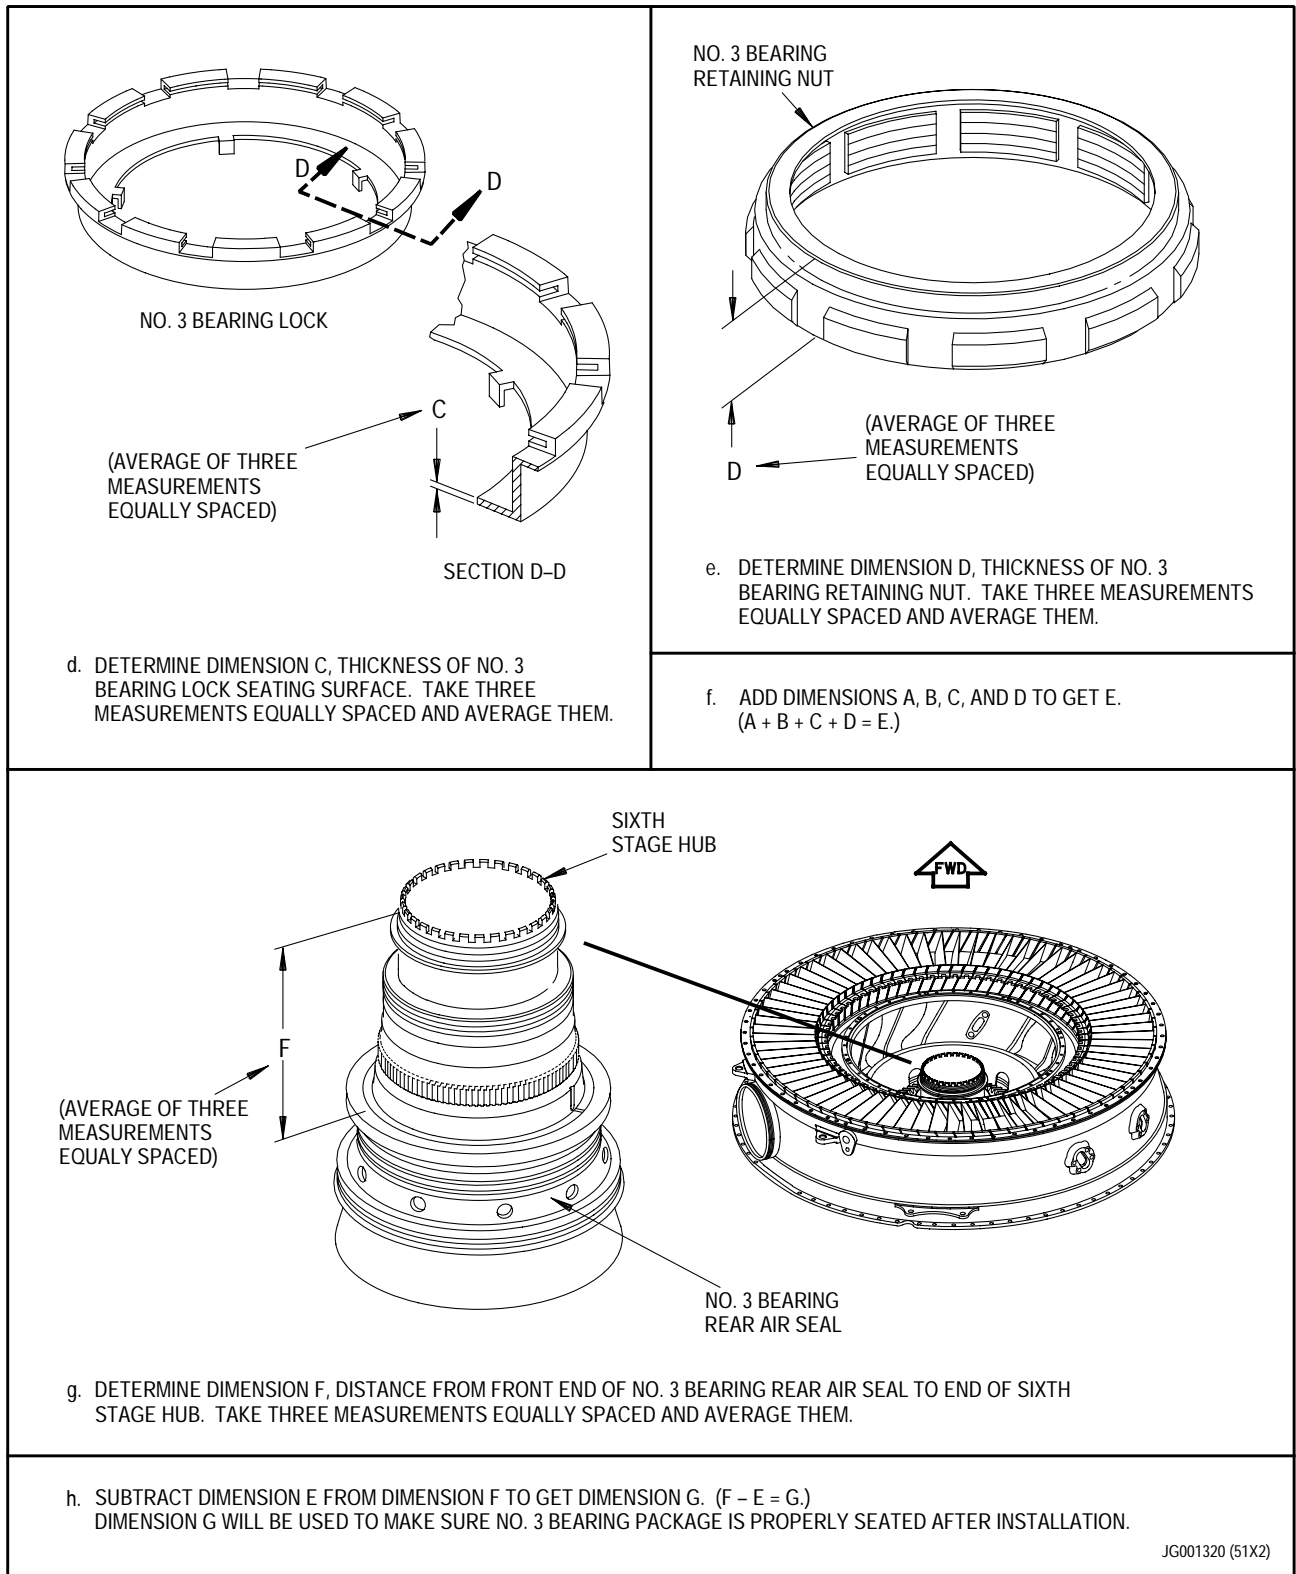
No. 3 Bearing Package - Measurement of Parts Before Installation (Sheet 2 of 2)
